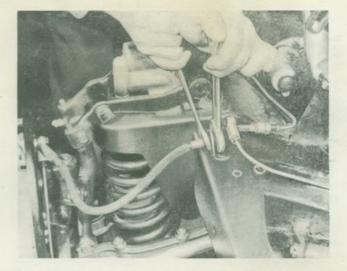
Employment of compressor when fitting R.H. front spring—Tool No. 20S.50.
